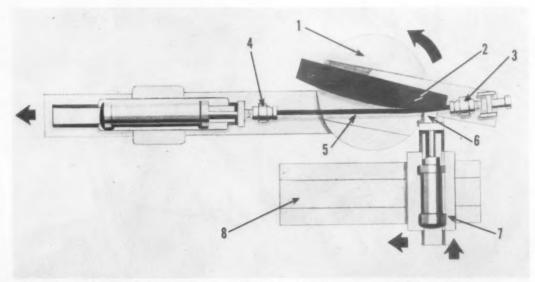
FIG. I—Principles of radial draw forming technique and basic components of the machine.
